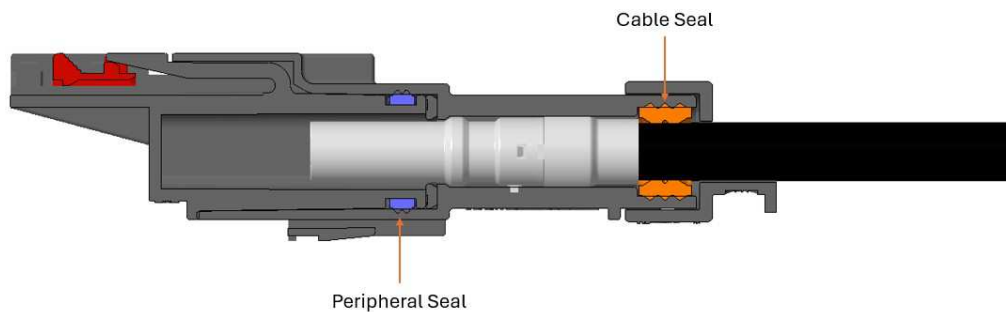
d: DT Highspeed Pin Assembly mated to Blind Plug Assembly (Universal Key)
